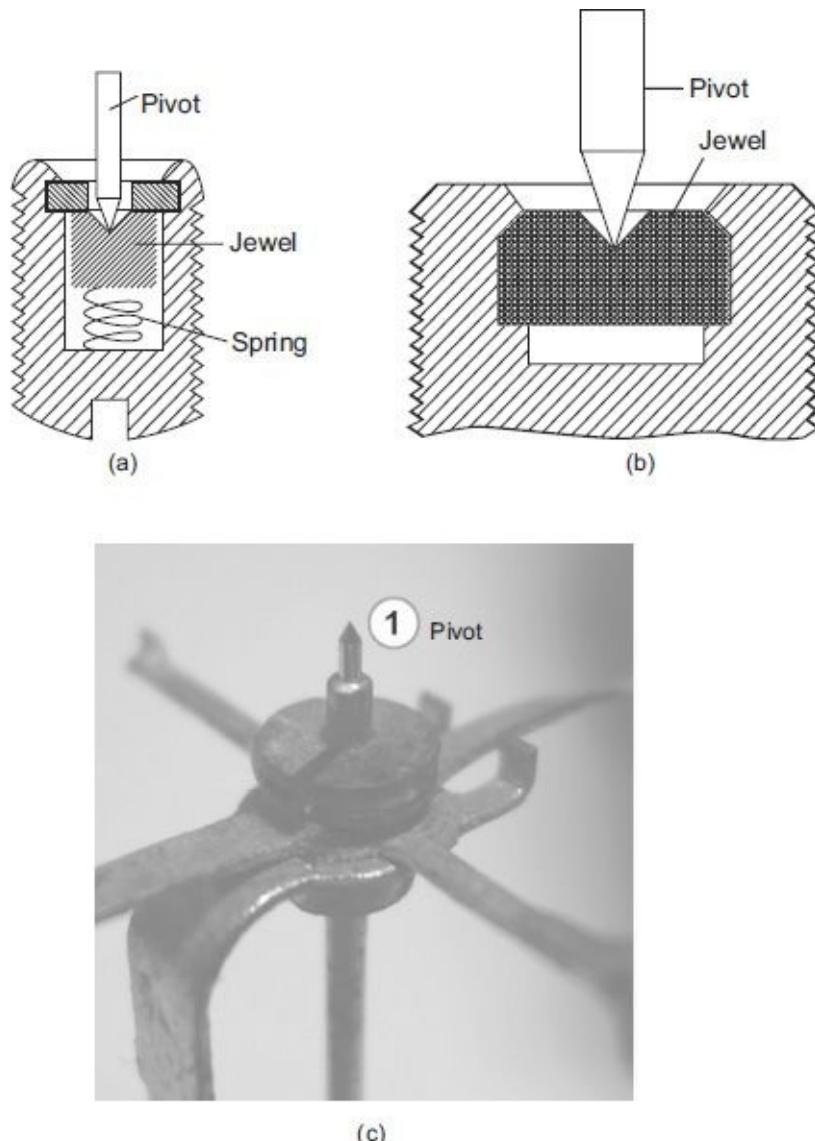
(a) Spring-loaded jewel bearing (b) Jewel bearing (c) Pivot
